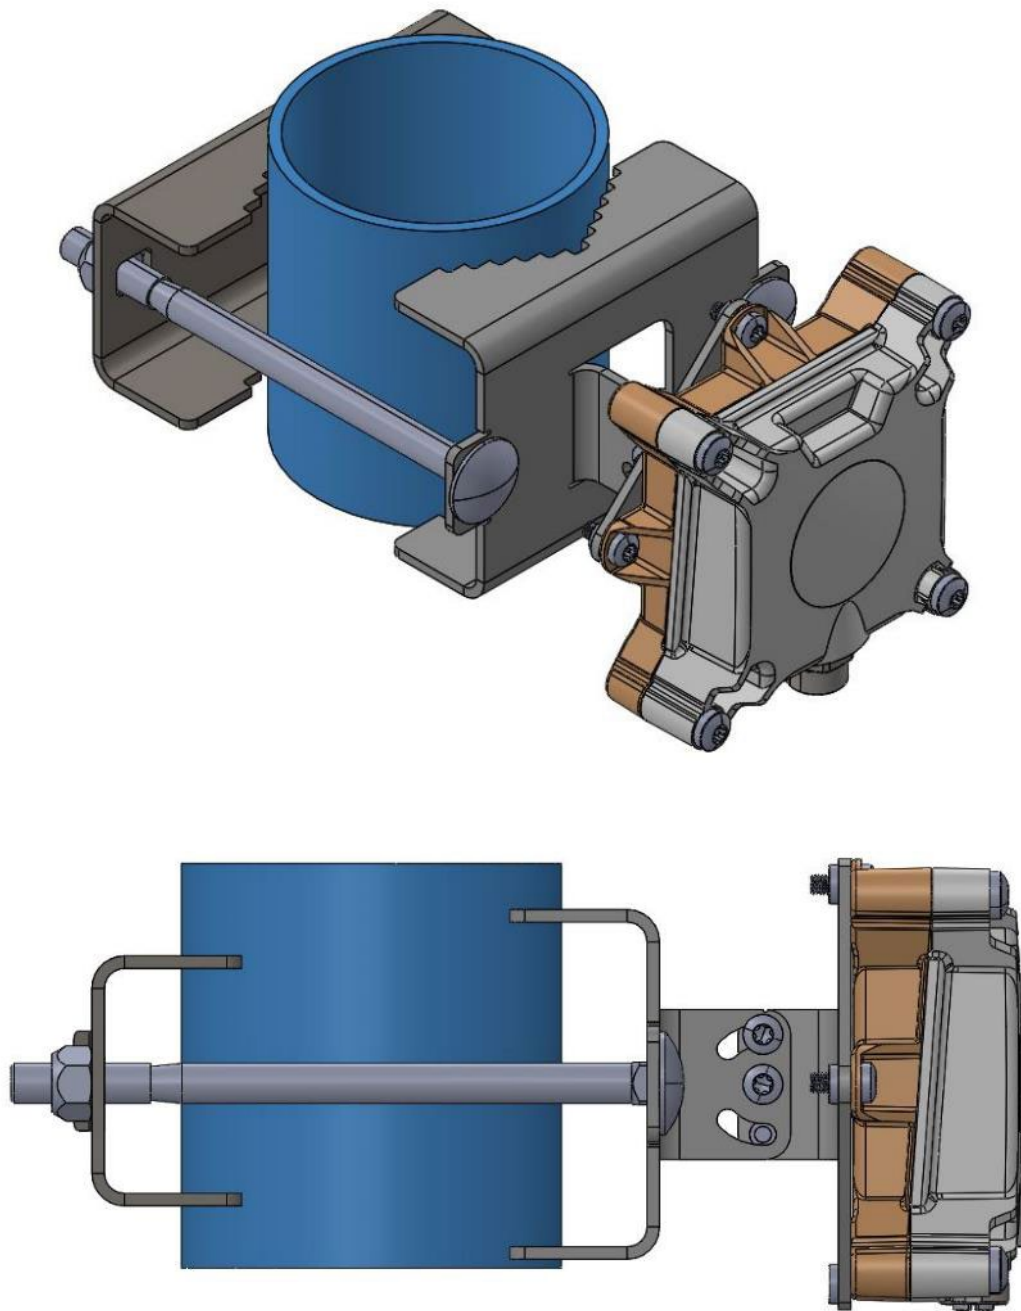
LPR®-1DHP-350 mounted to a pipe with the mounting bracket
